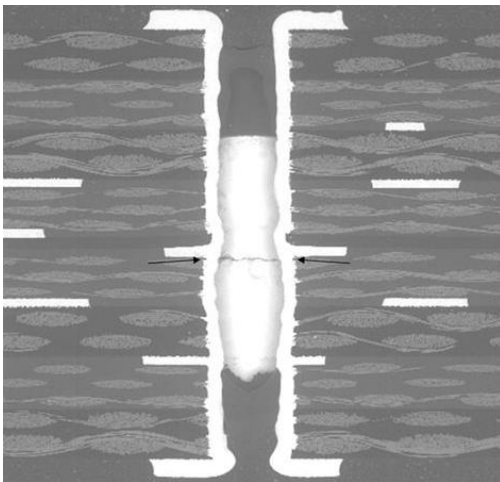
Circumferential barrel crack formation in a plated though hole [26]
